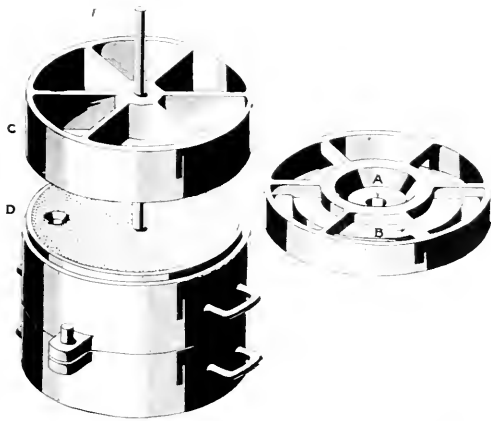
CASTING-IN A ROD IN SMALL STEAM-ENGINE PISTON
